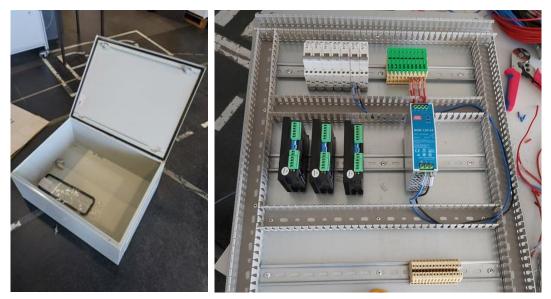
Box for the electrical panel and intermediate stage of its assembly
